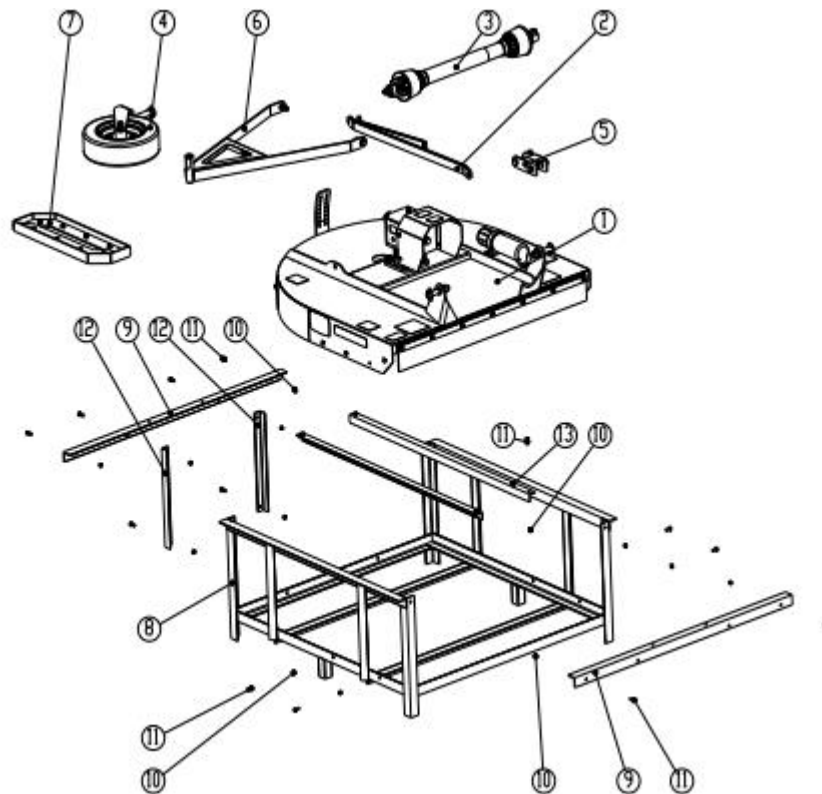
The Standard Rotary cutter and Accessory in Package
